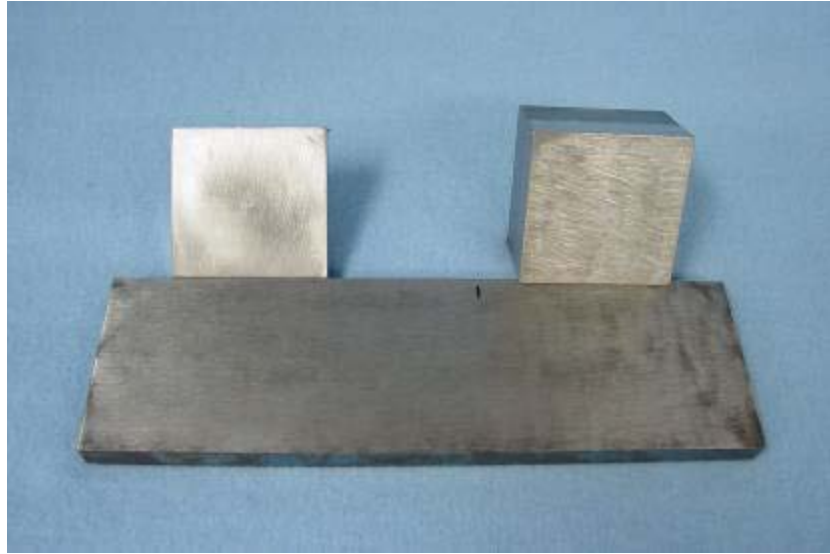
Three Cracked Weld Metal Coupons with Thermal Fatigue Crack on the Left, Weld Solidification Crack on the Right, and Laboratory Stress Corrosion Crack at Center
